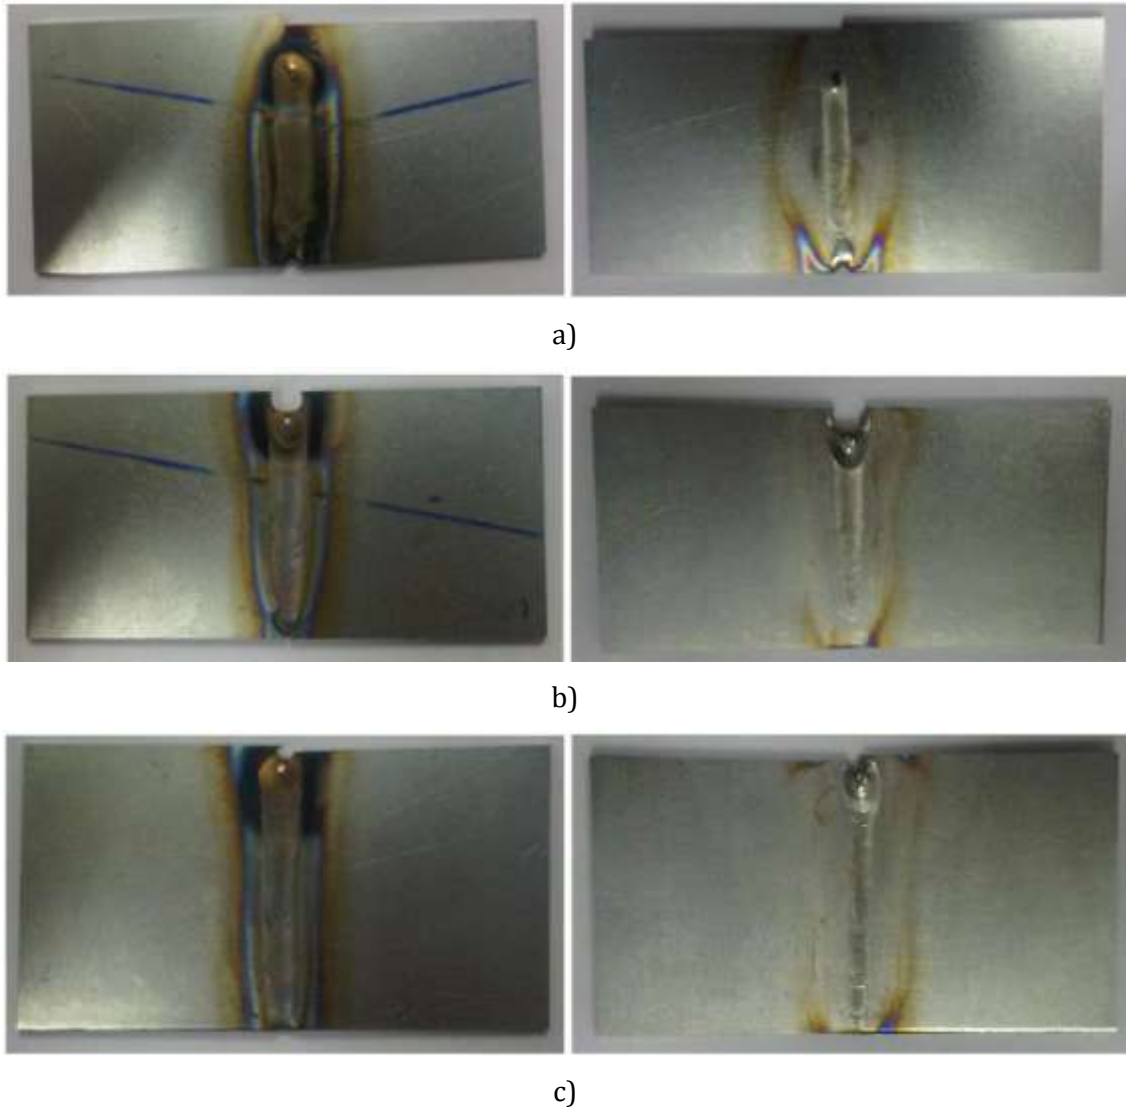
Aspect of similar NiTi butt weld joints: a) sample #1.1; b) sample #1.2 and c) sample #1.3.
